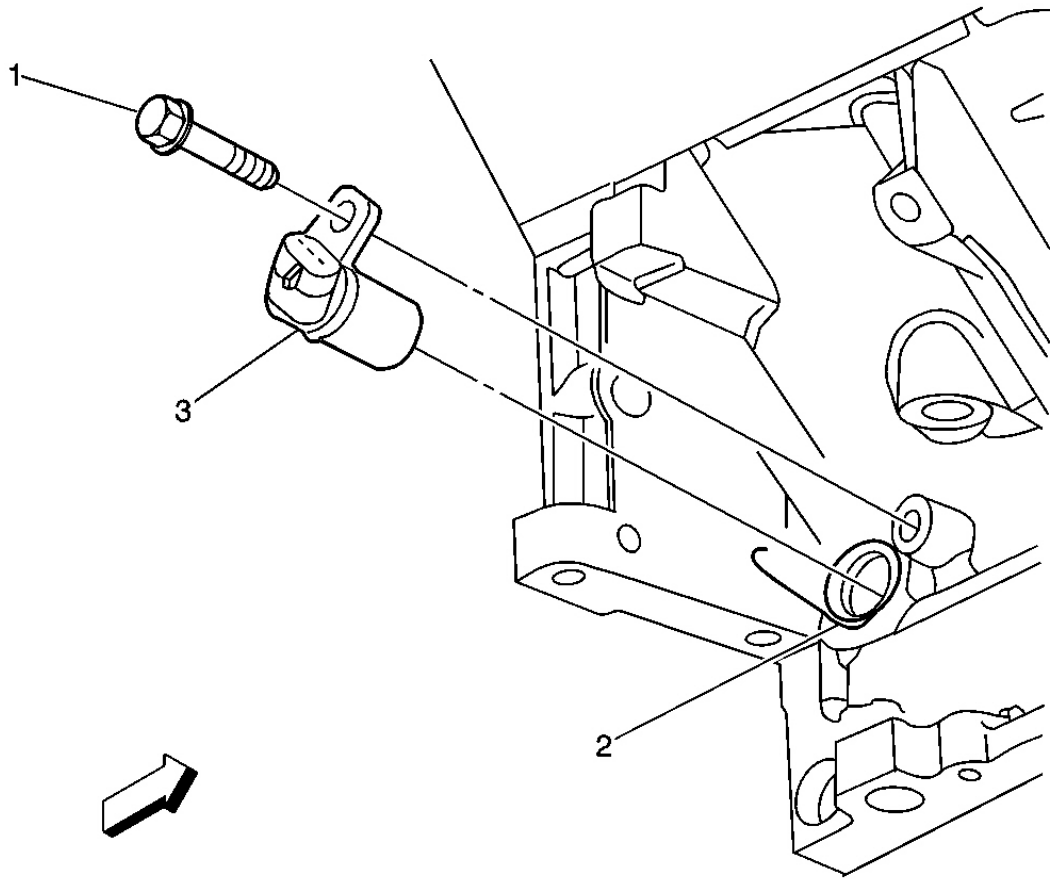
Crankshaft Position (CKP) Sensor Location Component Views
